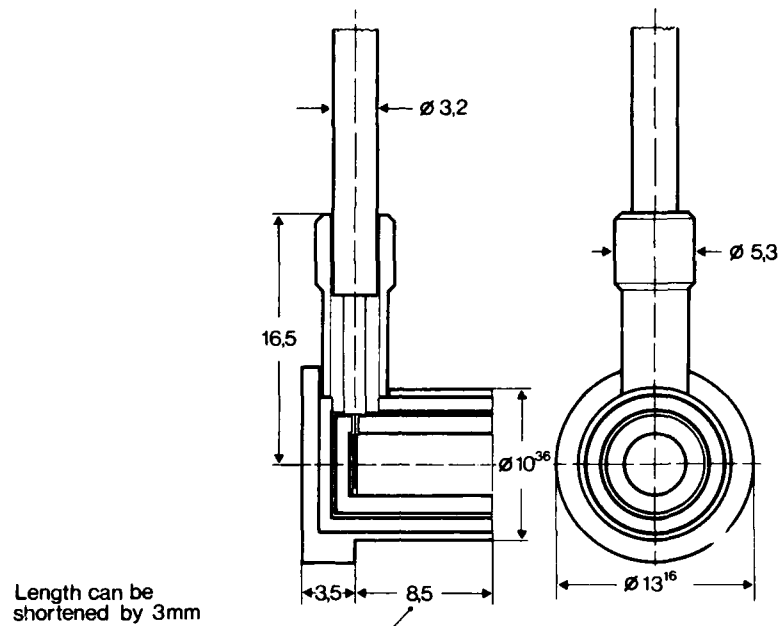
Dimensions of the Coulomb probe for core engine application (IP compressor, 1st stage) with rigid cable connexion
